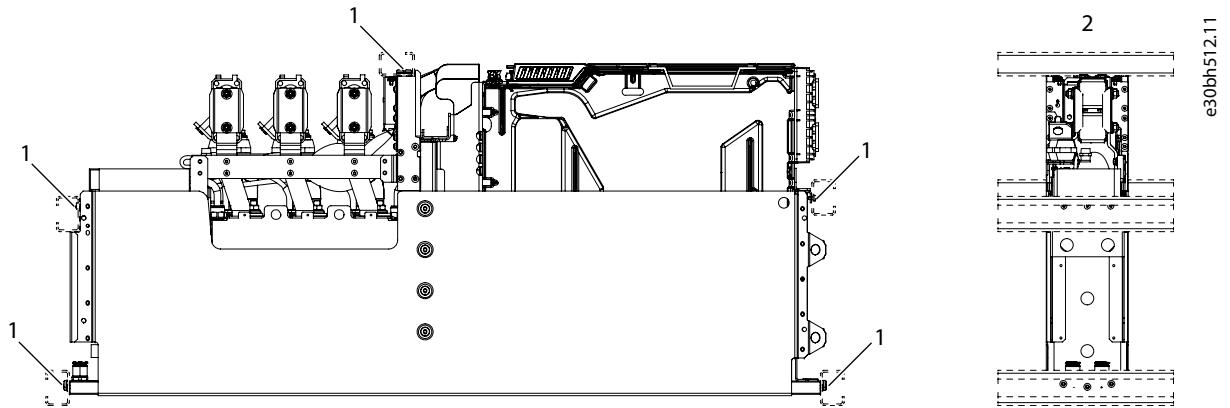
Mounting Holes of the System Module with the Integration Unit on its Backside
